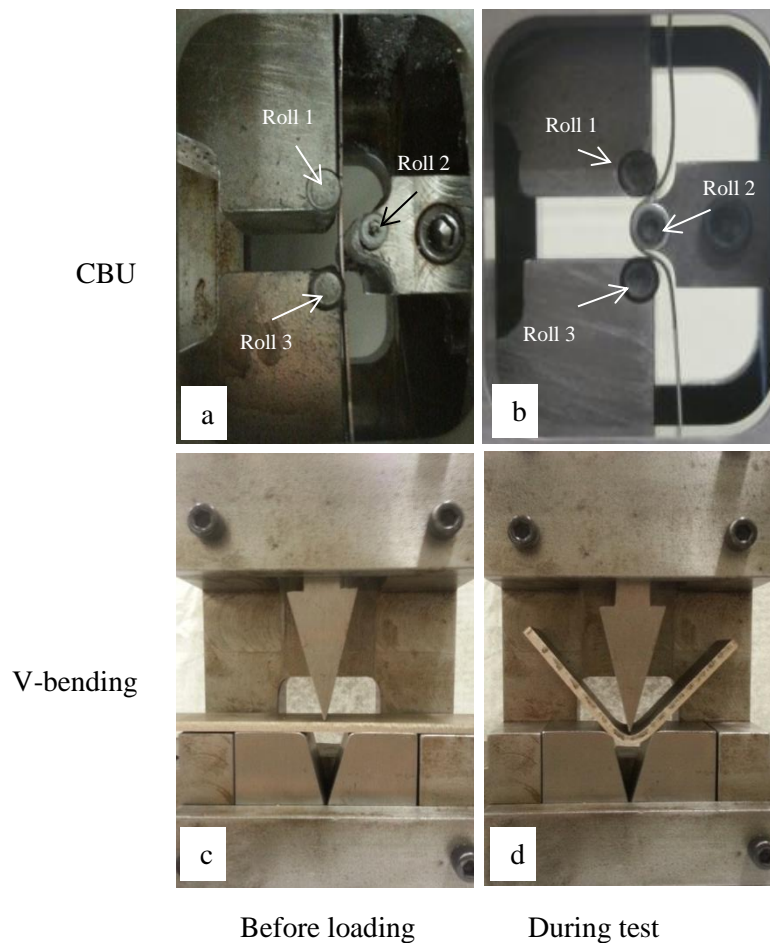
Test configurations for (a) bending-unbending device before loading in CBU process, (b) bending-unbending device during CBU process, (c) V-bending punch and die before test, (d) V-bending punch and die during test.
